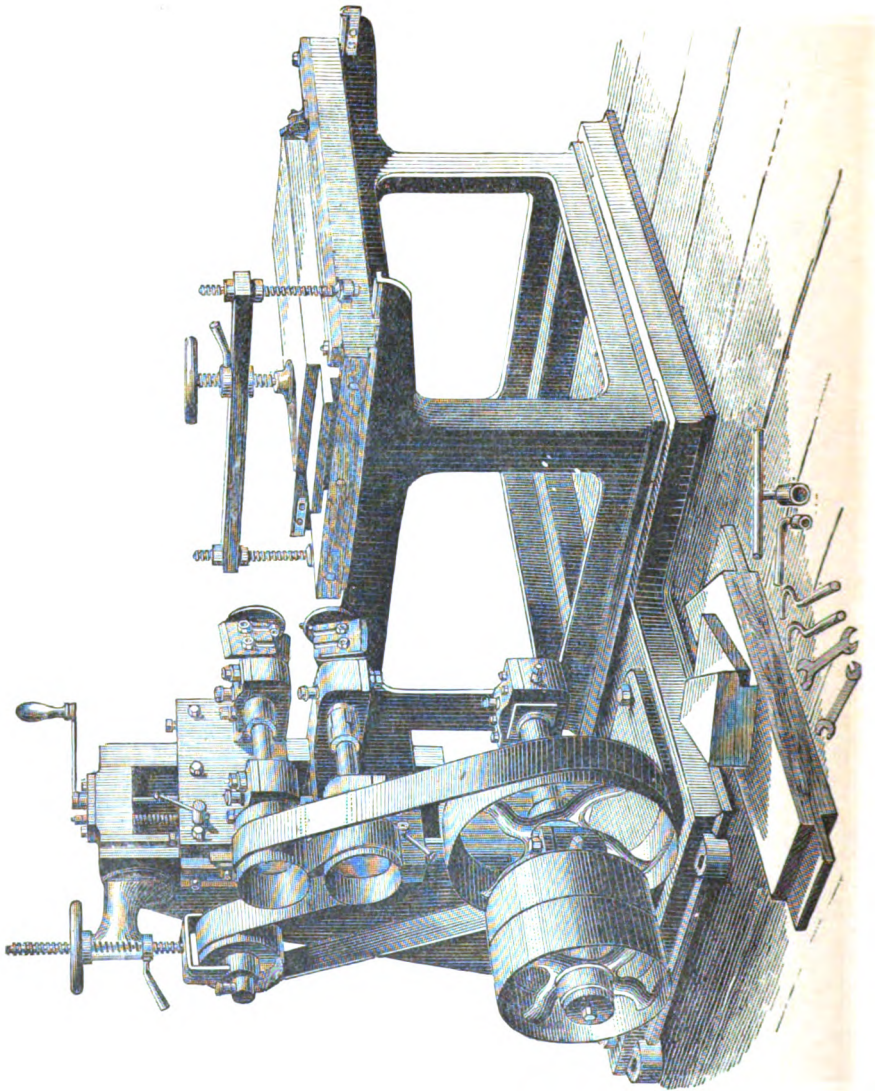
SINGLE AND DOUBLE TENON CUTTING MACHINE
